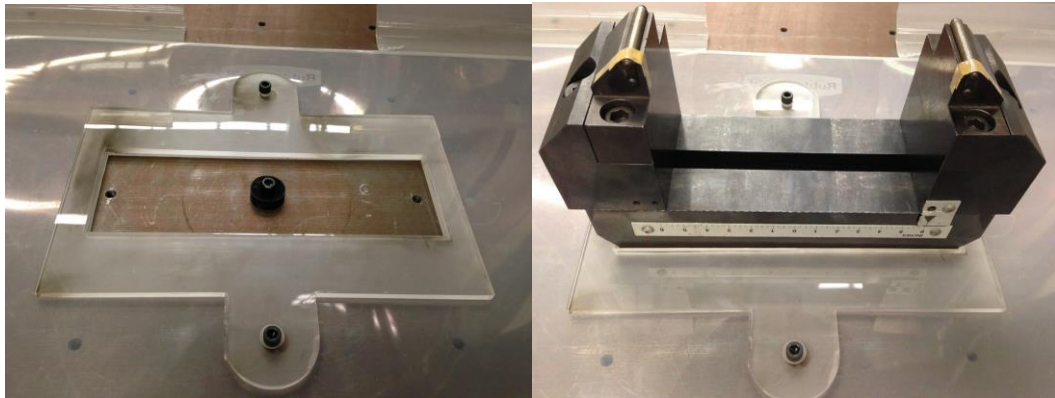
& 5: (Left) Alignment jig placed on the collection tub. (Right) Black support fixture placed inside the alignment jig.
